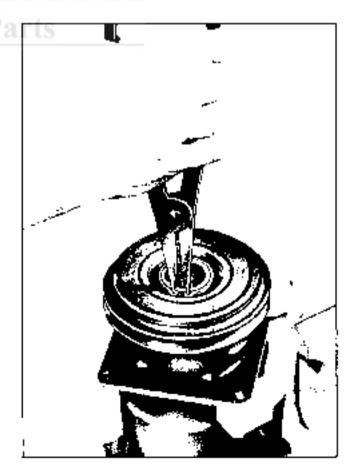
A-9 Removing Pulley and Boaring Assembly Retainer Ring
